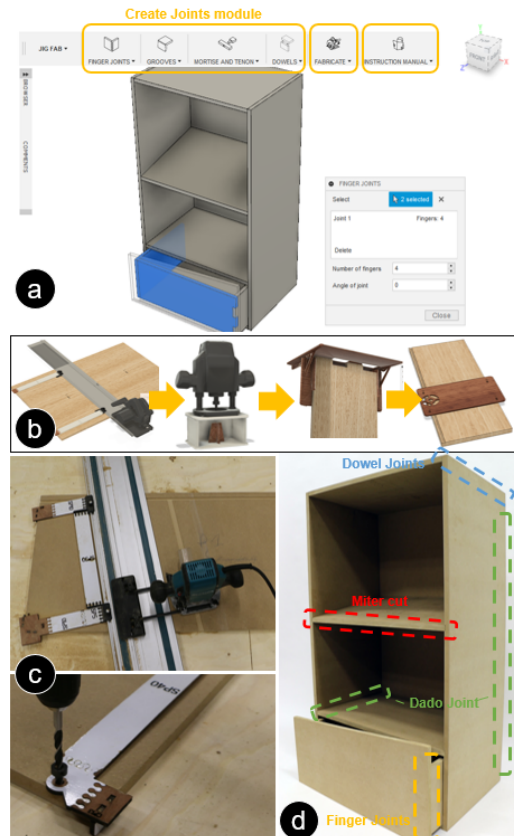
JigFab's end-to-end design and fabrication workflow: (a) Embedding joints in the 3D model, (b) Custom constraints and instructions are generated, (c) Fabrication by constraining power tools, (d) The assembled work piece.
